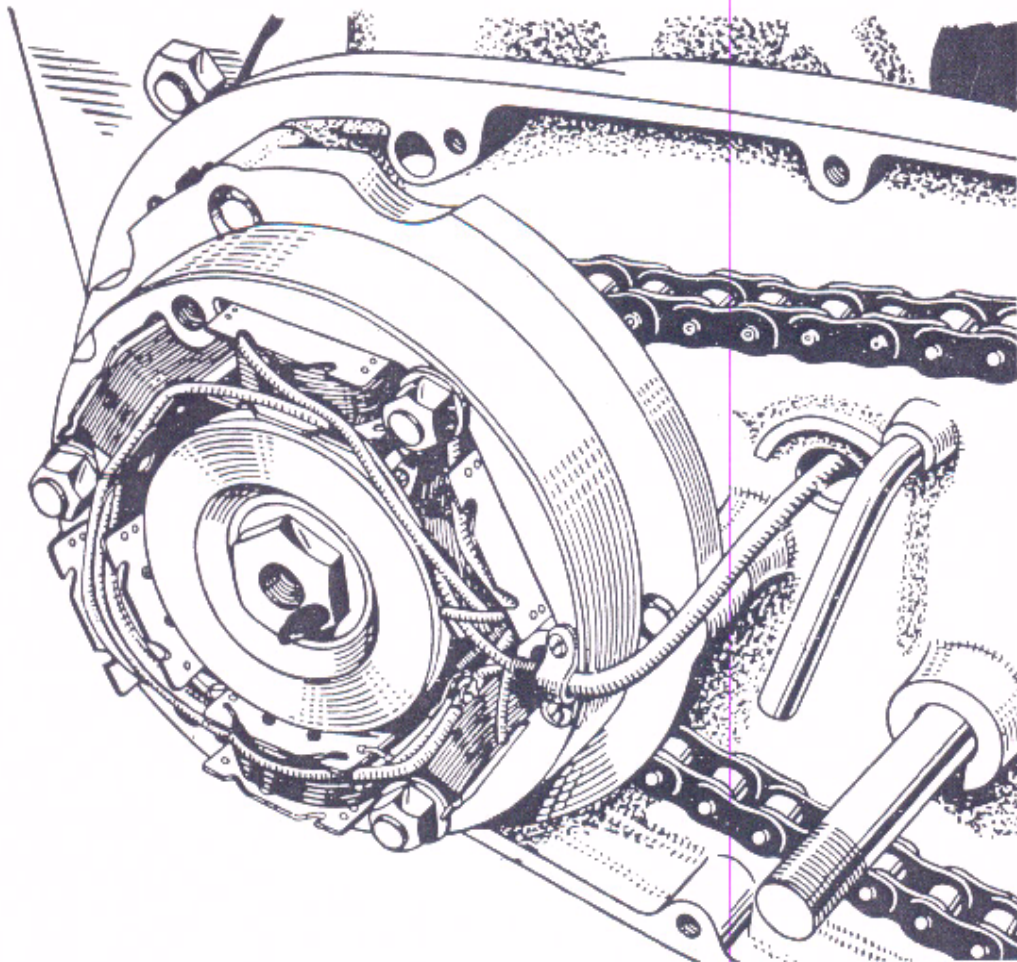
PRIMARY CHAINCASE COVER REMOVED TO SHOW ROTOR AND STATOR.
